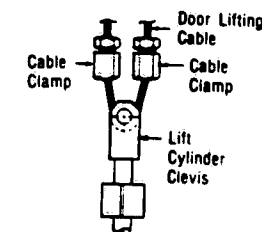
CONNECTING DOOR LIFTING CABLE.
